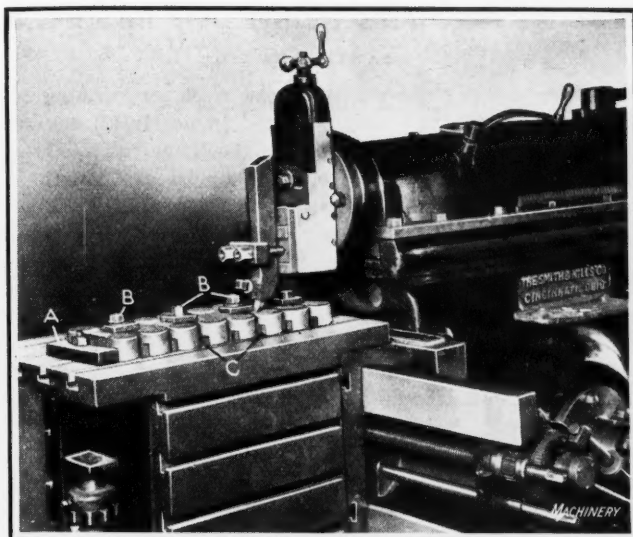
Crank Shaper equipped for planing the Bosses on a String of Eight Shaper Pendulum Links
